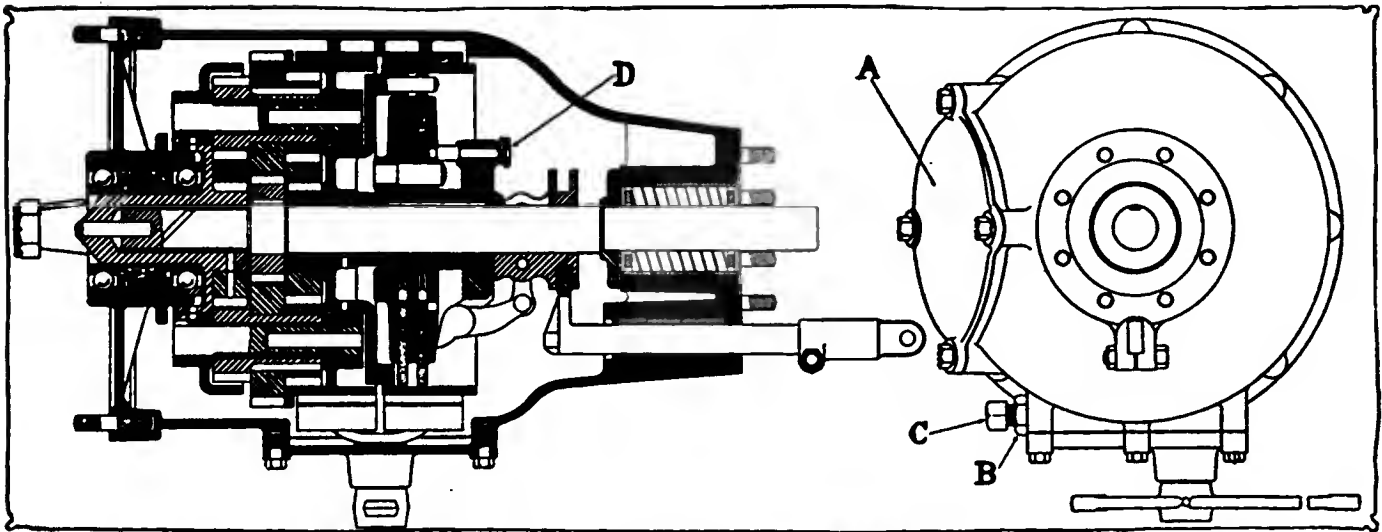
Planetary gear used on the Overland, showing the points which are essential to the making of an adjustment
